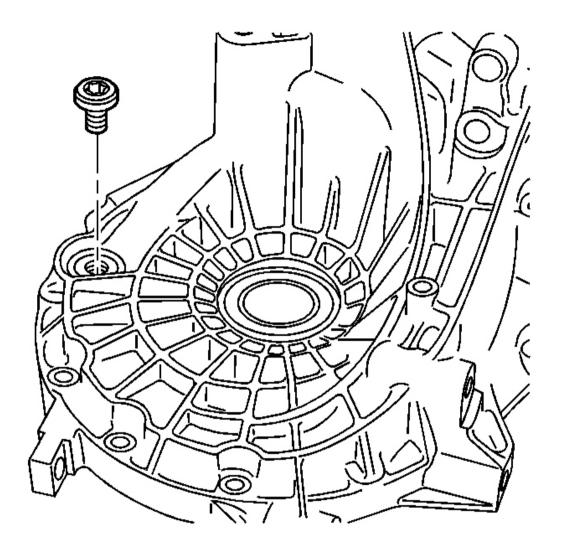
Transmission Drain Plug Courtesy of GENERAL MOTORS CORP.
